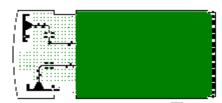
Dualband PCB Antenna on PCMCIA Card PCB Fab
